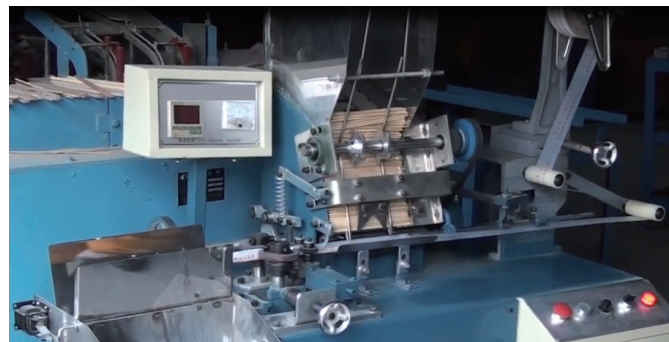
(Color online) Automatic printing and packing machine for rod-shaped objects.
